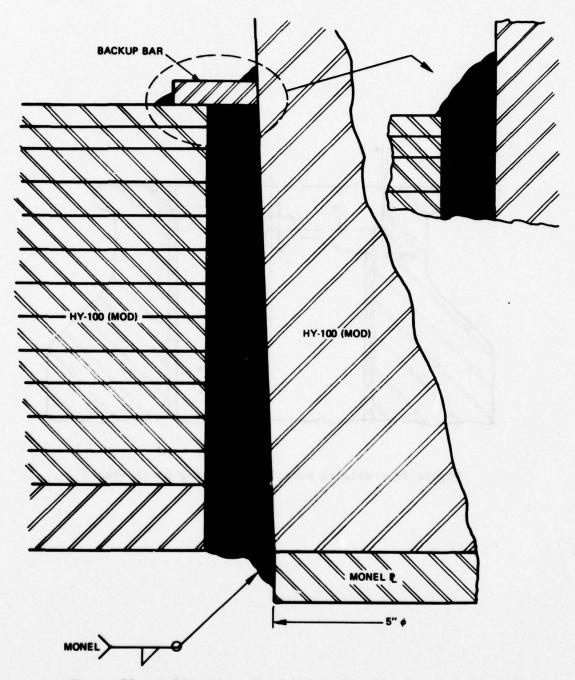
Welding Details for Securing Nozzles in Cylinders
